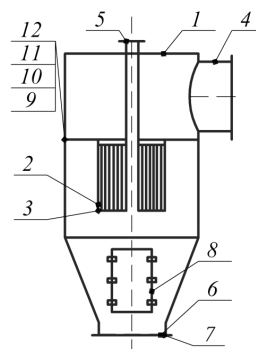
The designed model of a dryer in the pseudo-liquefied layer of an inert carrier: 1 – drying chamber; 2 – product capturer; 3 – openings; 4 – outlet nozzle; 5 – inlet nozzle; 6 – gas distribution grille; 7 – inlet for a heat-carrier; 8 – hatch; 9 – bolts; 10 – nuts; 11 – sealing; 12 – gasket
